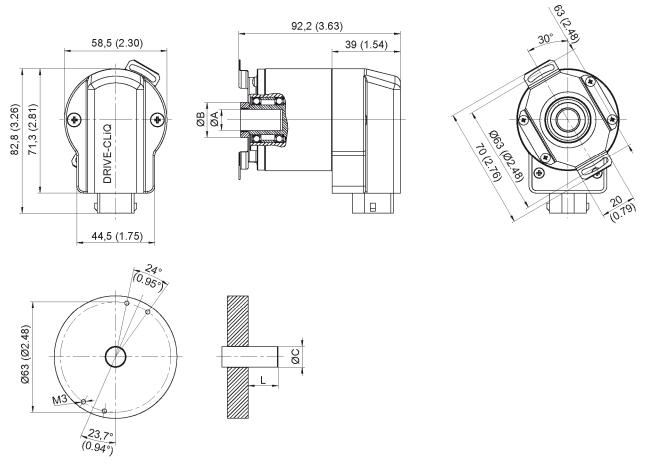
Dimension drawing of hollow shaft, all data in mm and (inches)
